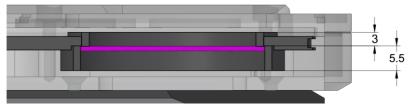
M3 threaded holes, used to mount the "XL" sized EFW, on the asymmetrical C5A camera head
